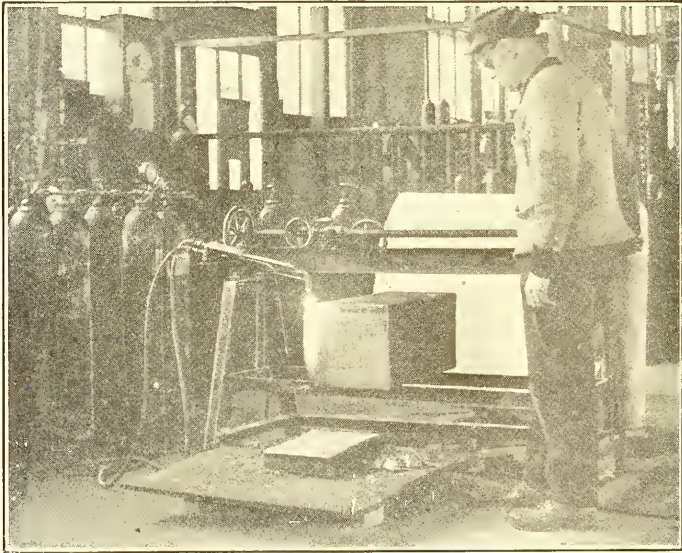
Cutting a Billet with an Oxweld Machine.
